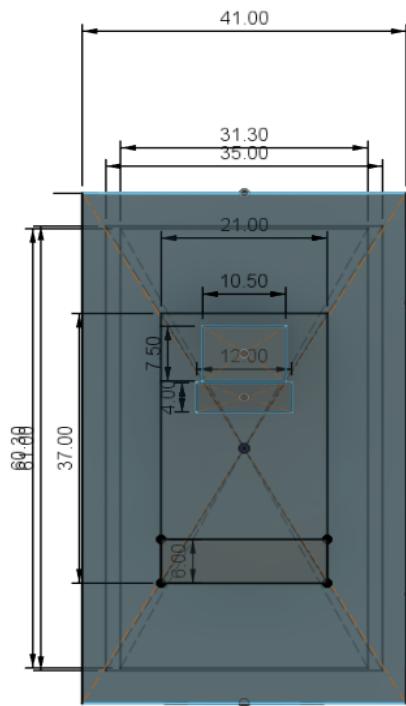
9 BACK VIEW OF LASER MODULE HOLDER BRACKET
